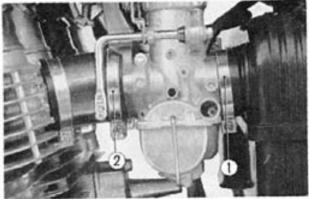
① Air cleaner connecting band ② Carburetor insulator band
